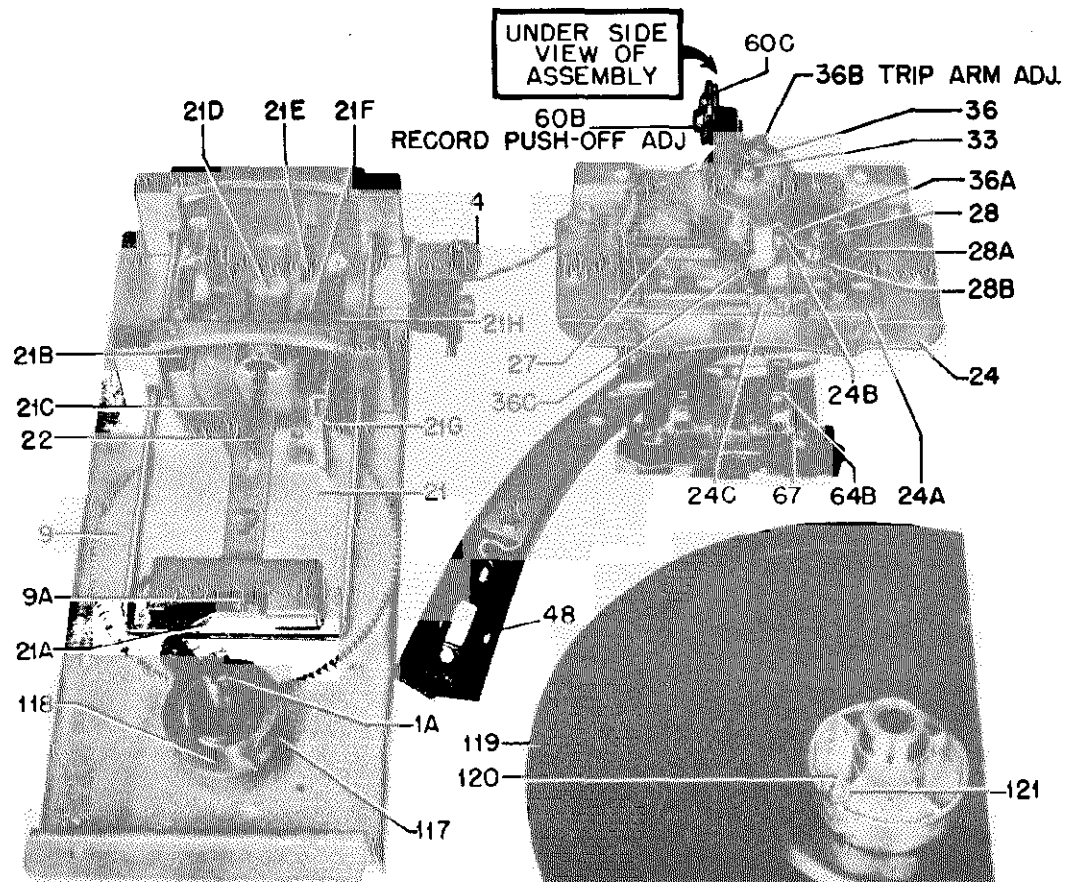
DISASSEMBLED VIEW OF RECORD CHANGER MECHANISM
